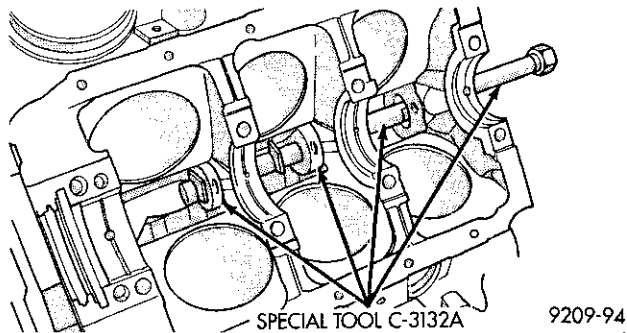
Camshaft Bearings Removal and Installation with Tool C-3132-A
